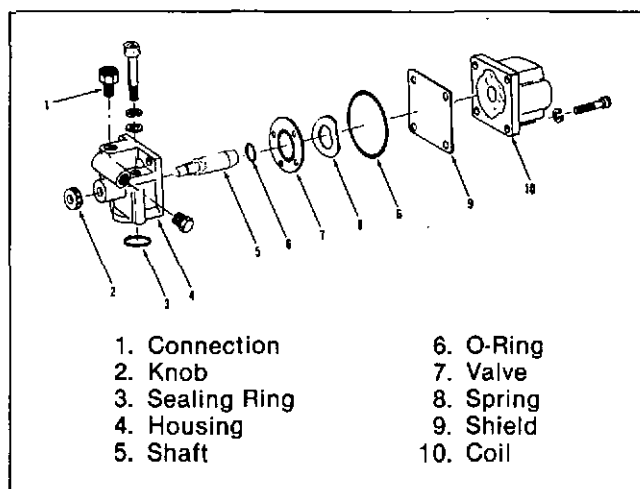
, (F5143). Electric shutoff valve — disassembled view.
